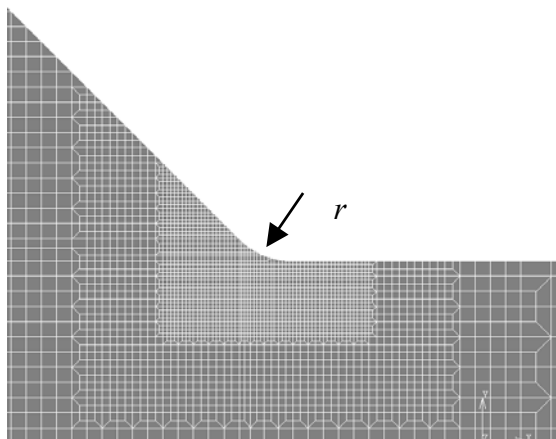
Geometry configurations of T-shaped welded joint
